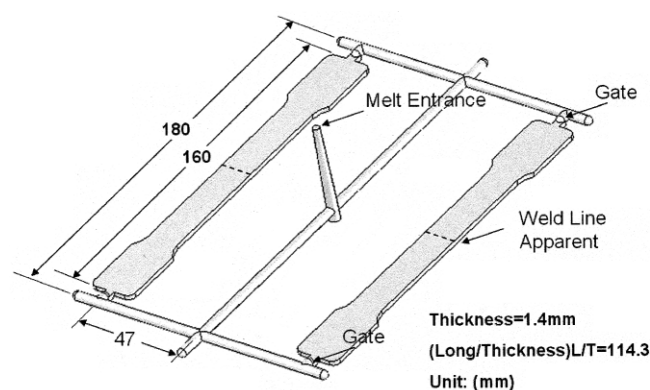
The double-gated tensile test specimen with length/thickness = 114.3 as thin-wall molding and the weld line appearance in the middle of the part.
